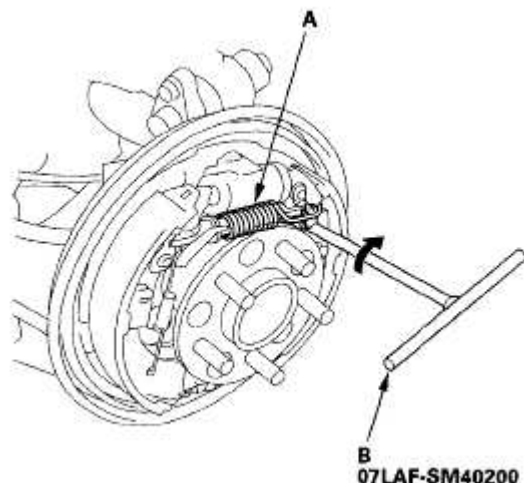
Identifying Upper Return Spring From Rearward Shoe
